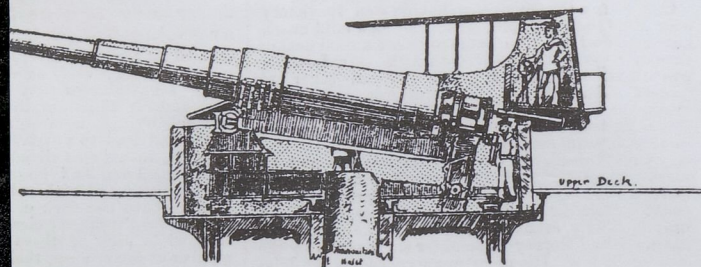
32-centimetre Canet Gun, mounted on Barbette, on board a French Battleship.
